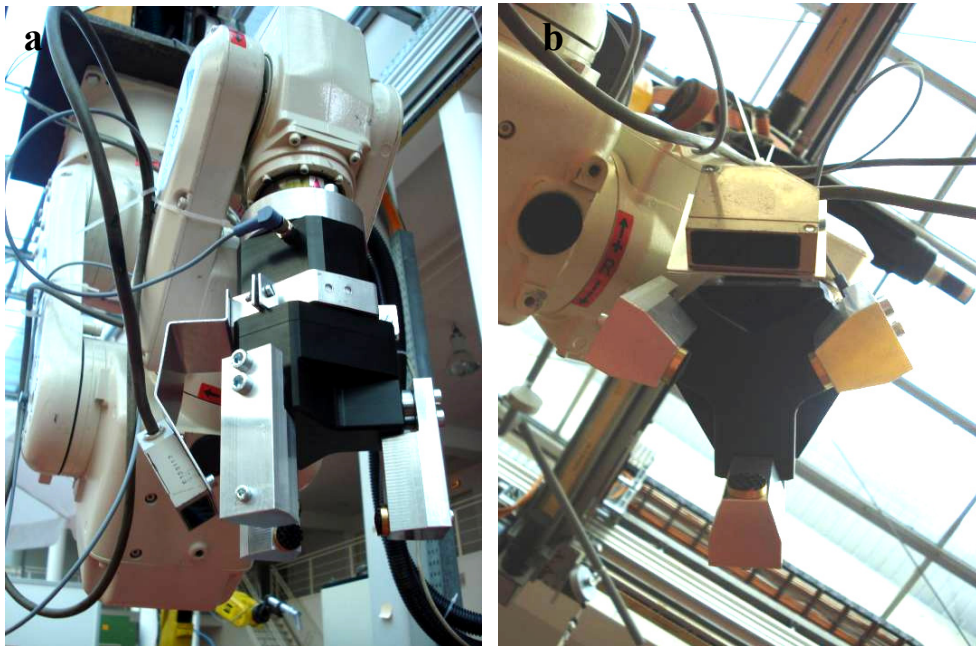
Final mounting of the sensor with the gripper, a) lateral view and
